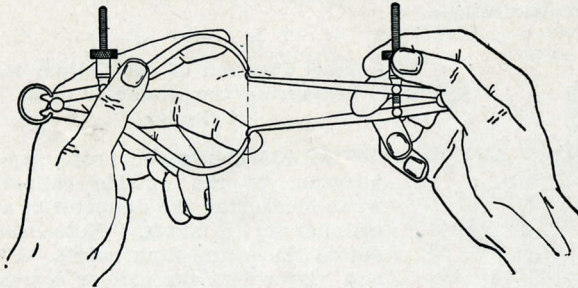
Transferring Measurement from an Outside to an Inside Caliper
